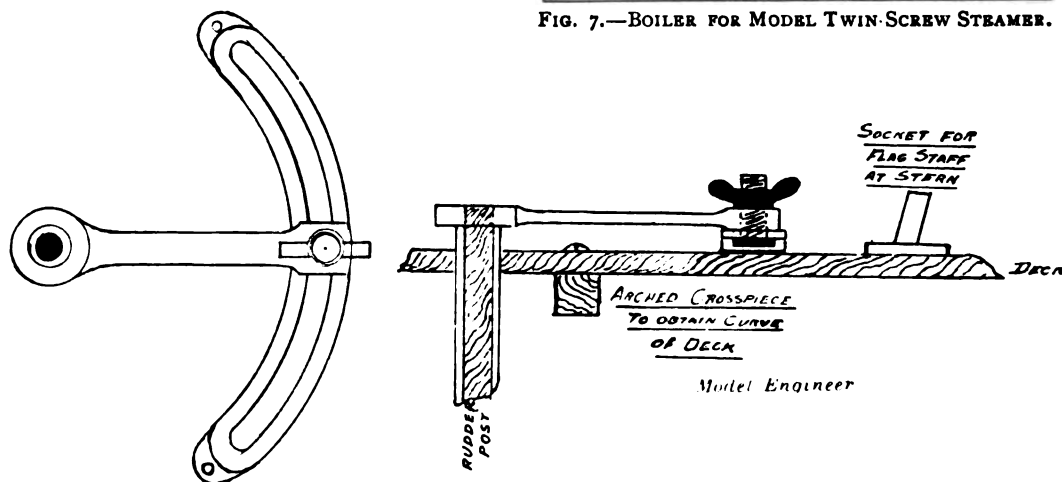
ADJUSTABLE TILLER OR STEERING GEAR.
